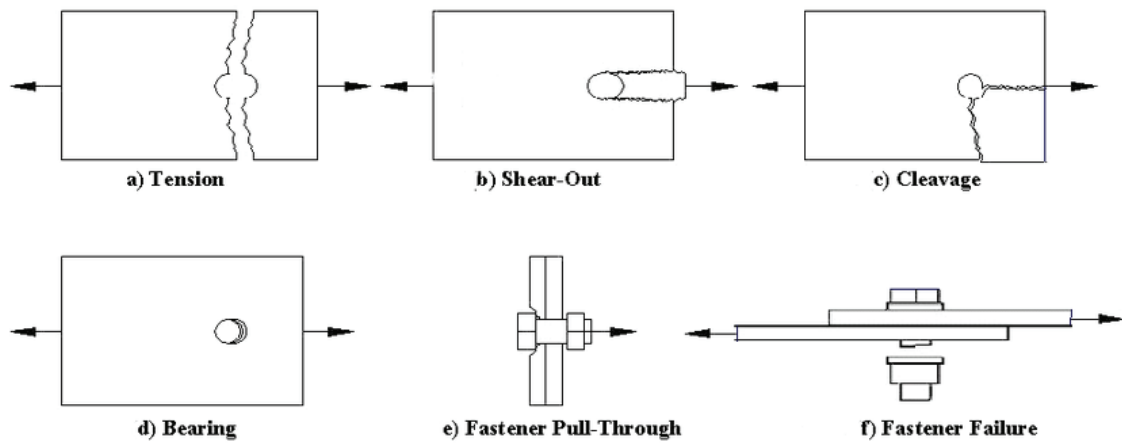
Schematic illustration of deformation modes (a) tension (b) shear (c) cleavage (d) bearing (e) fastener pull-through and (f) fastener failure
